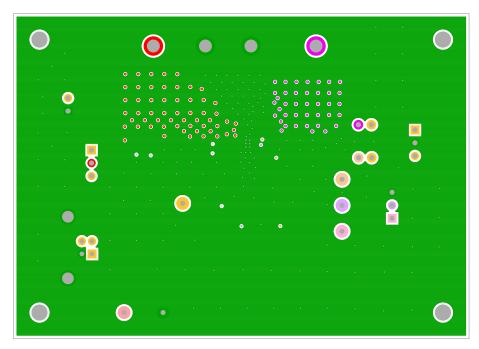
BOTTOM LAYER SOLDER SIDE
